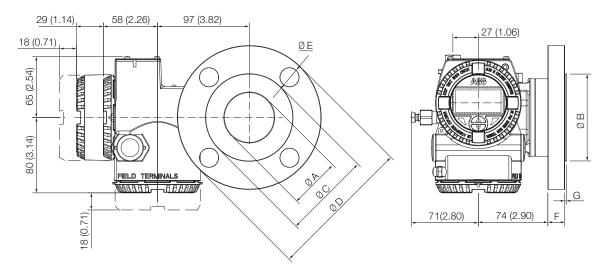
$\,\,$  Transmitter with barrel housing - flange mounted version
